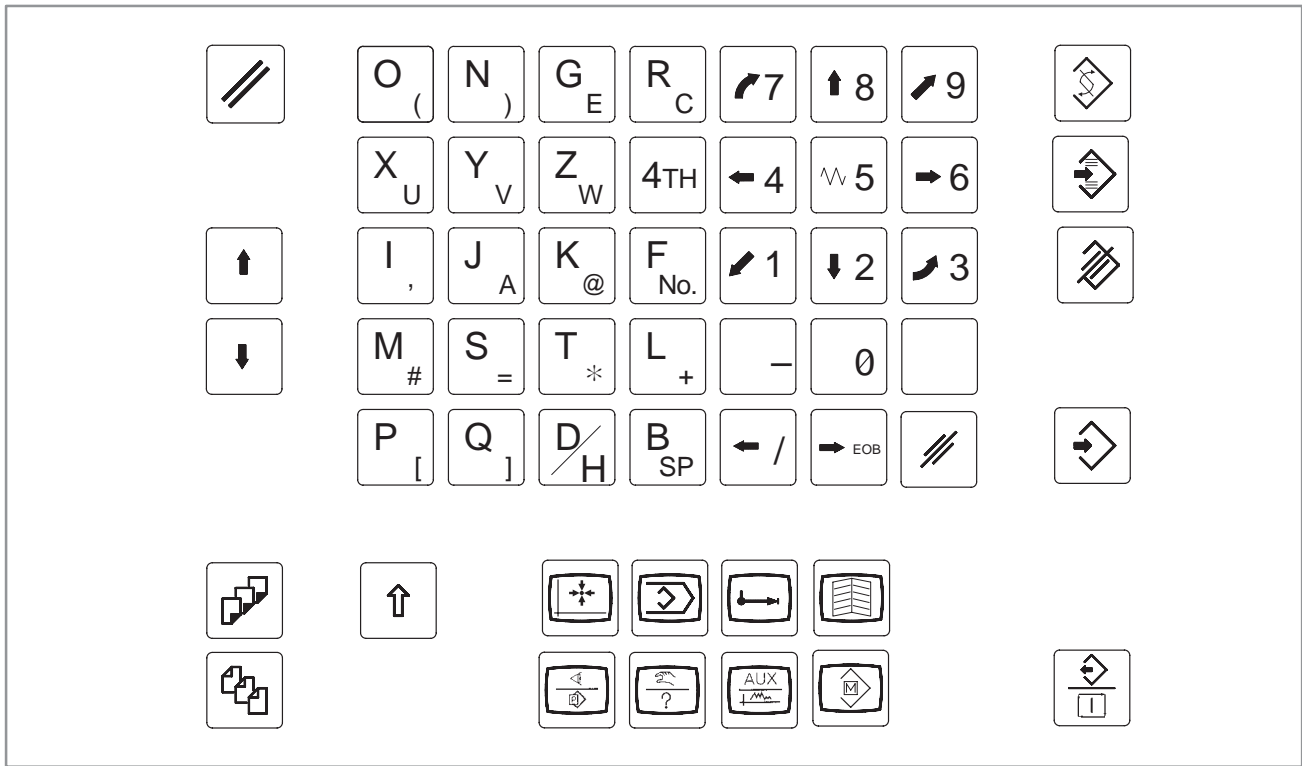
Symbolic key sheet for full-key MDI for machining centers
